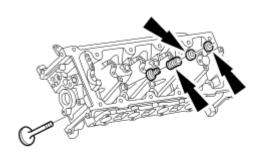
Compressing Valve Spring Courtesy of FORD MOTOR CO.
